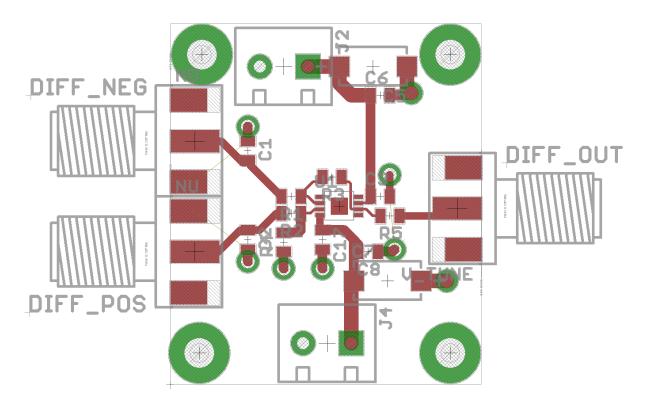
Differential Amplifier Printed Circuit Board Layout
